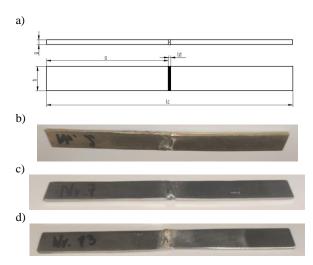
Welded joints: a) diagram of butt welded joint used in the tests, b) made of copper alloy, c) made of unalloyed structural steel, d) made of acid-resistant steel
